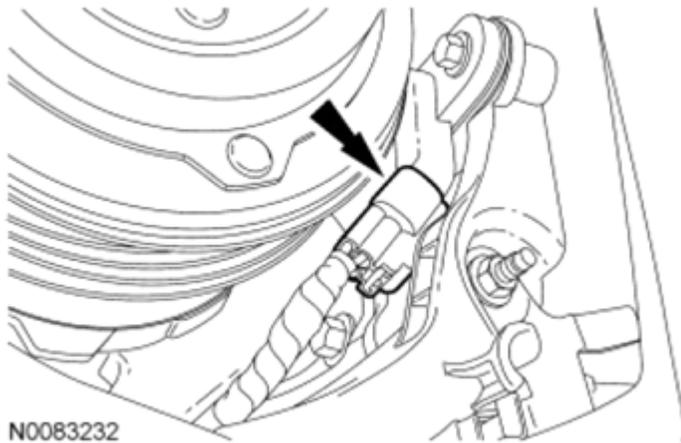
Locating Crankshaft Position (CKP) Sensor Electrical Connector
